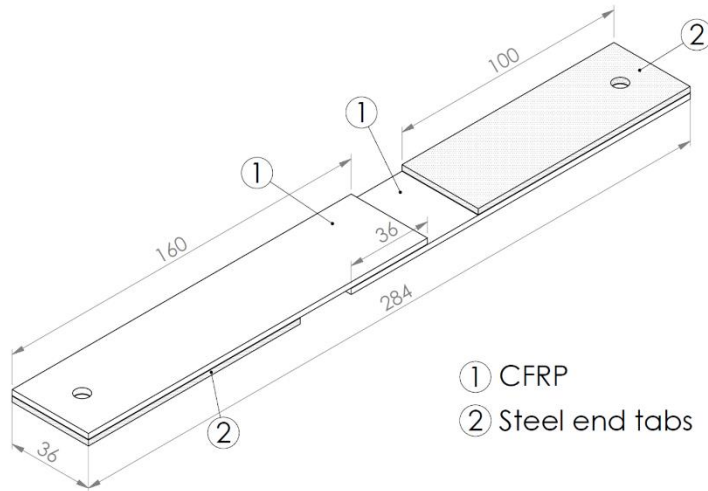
Small-scale specimens' geometry and main dimensions (isometric view)
